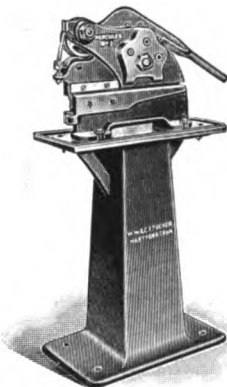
Reverse Side Nos. 1, 2 and 5 Machine
